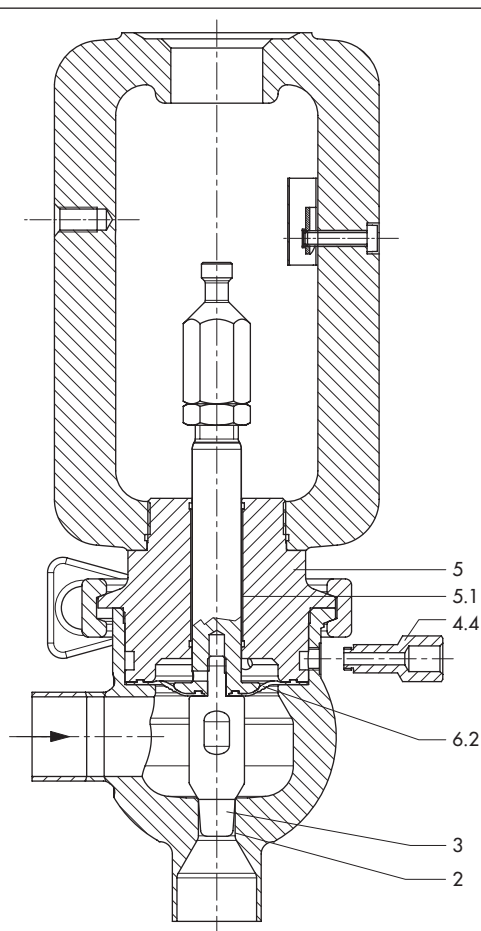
Type 3249 Angle Valve in standard version with optional nipple fitting for the test connection (4.4)
